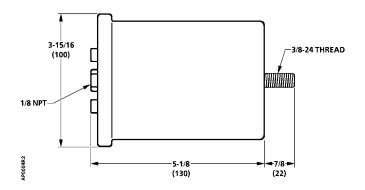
No. 3 Pneumatic Damper Actuator Dimensions. Dimensions are in Inches (Millimeters).
